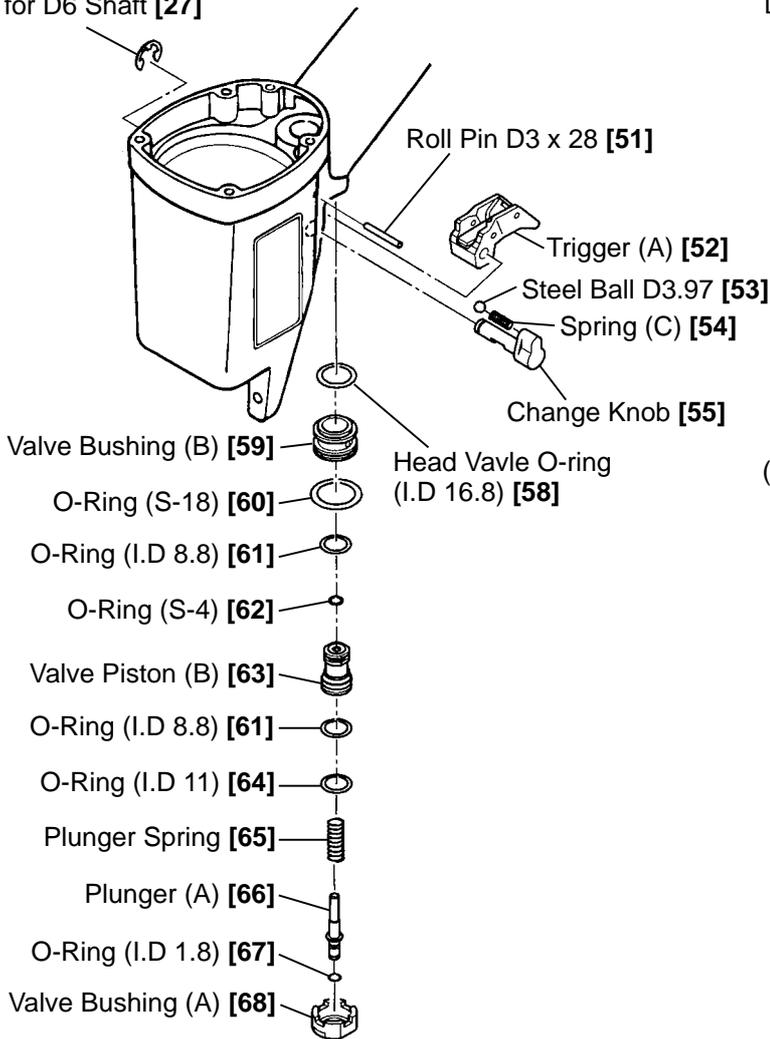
Disassembly and reassembly of the valve bushing, plunger, etc.
